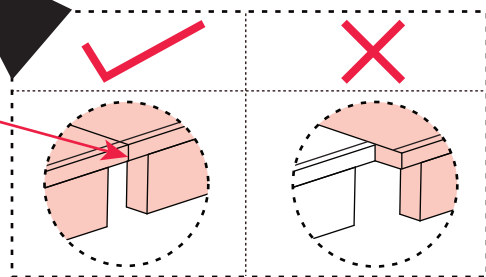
Assembly / Ensamblaje FIG. 5 / FIG. 5 Assemblage
